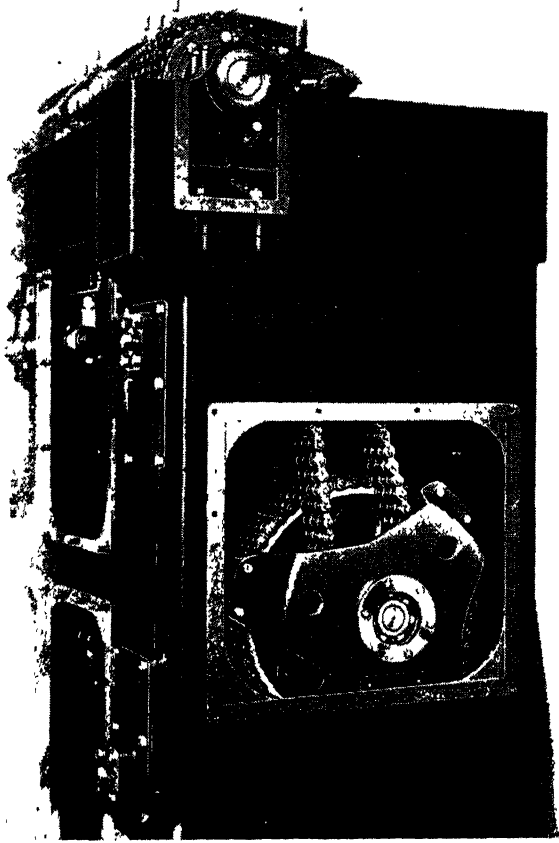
Roller Chain on Diesel-Engine Valve Drive.
